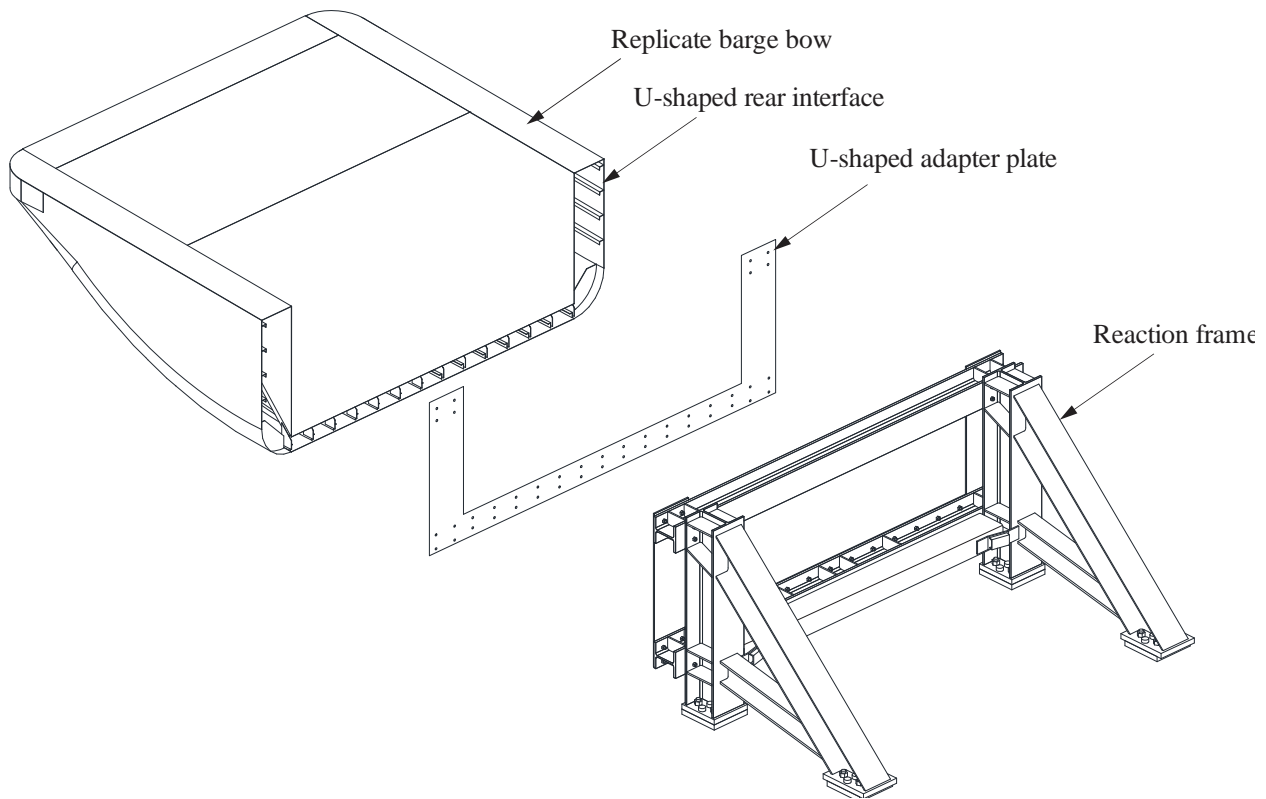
Exploded view of connection between replicate barge bow and reaction frame
